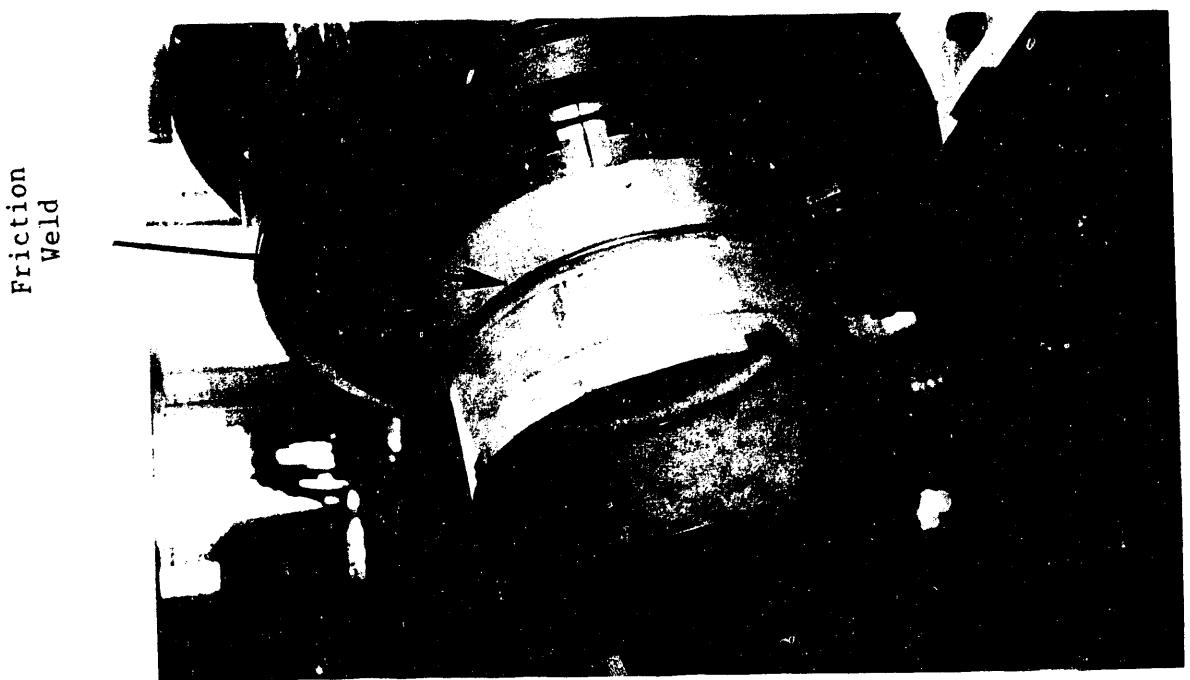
B. Welded Specimen Partially Removed From Collet.
